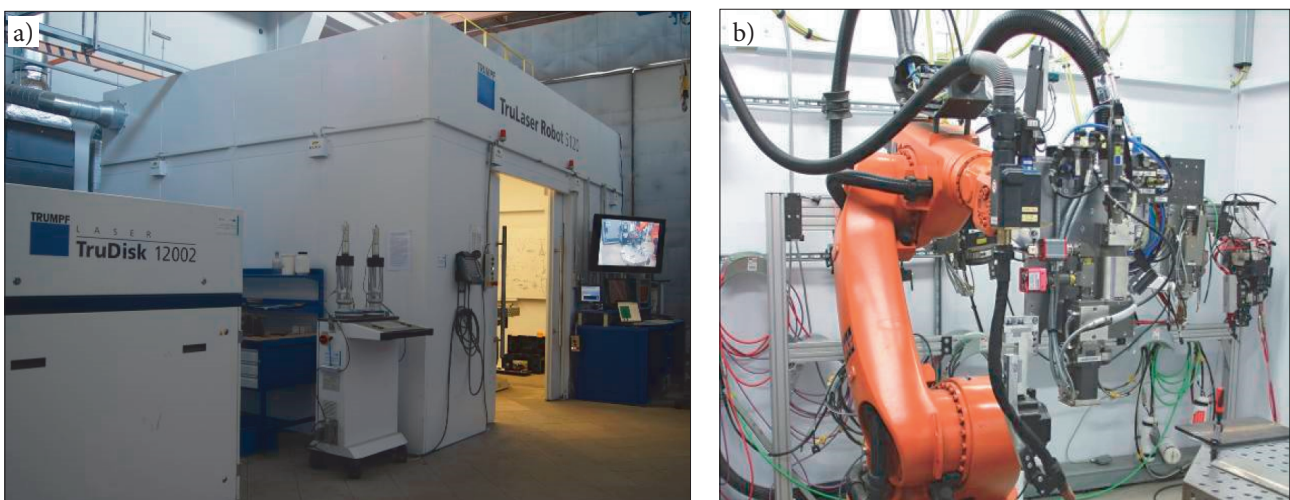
Robotic laser welding station featuring the TruDisk 12002 disk laser: a) main view, b) laser and hybrid welding head (D70), integrated with the industrial robot
